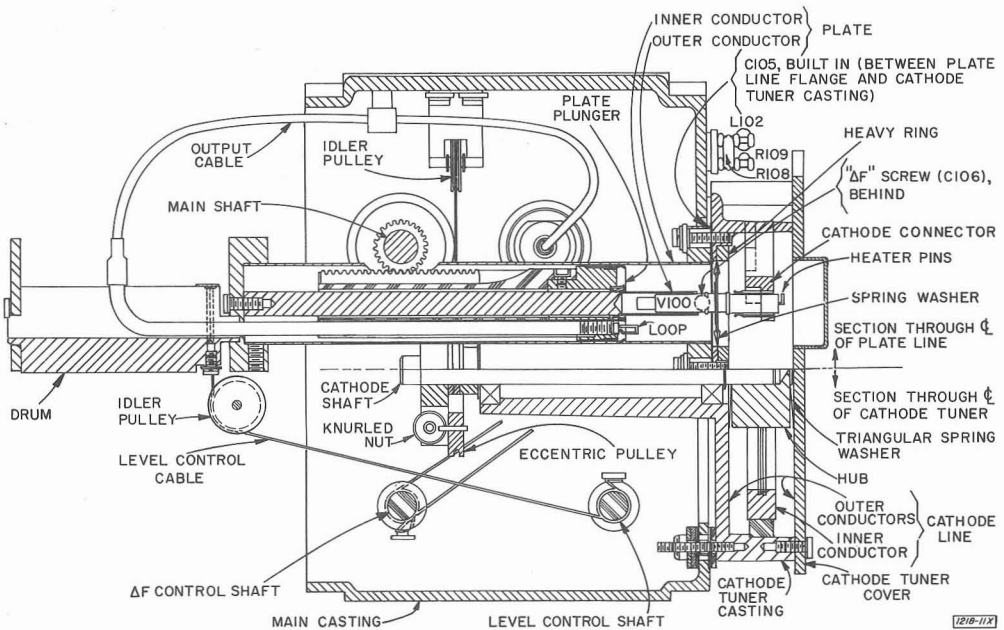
Cross-section view of Type 1218-B oscillator tuning structure.
